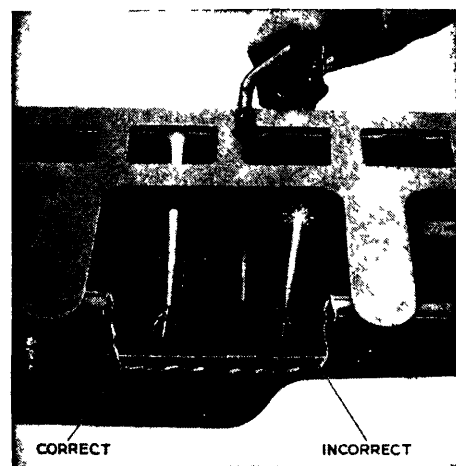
Checking aim of oil nozzles, using target gauge and water. 1935-52
